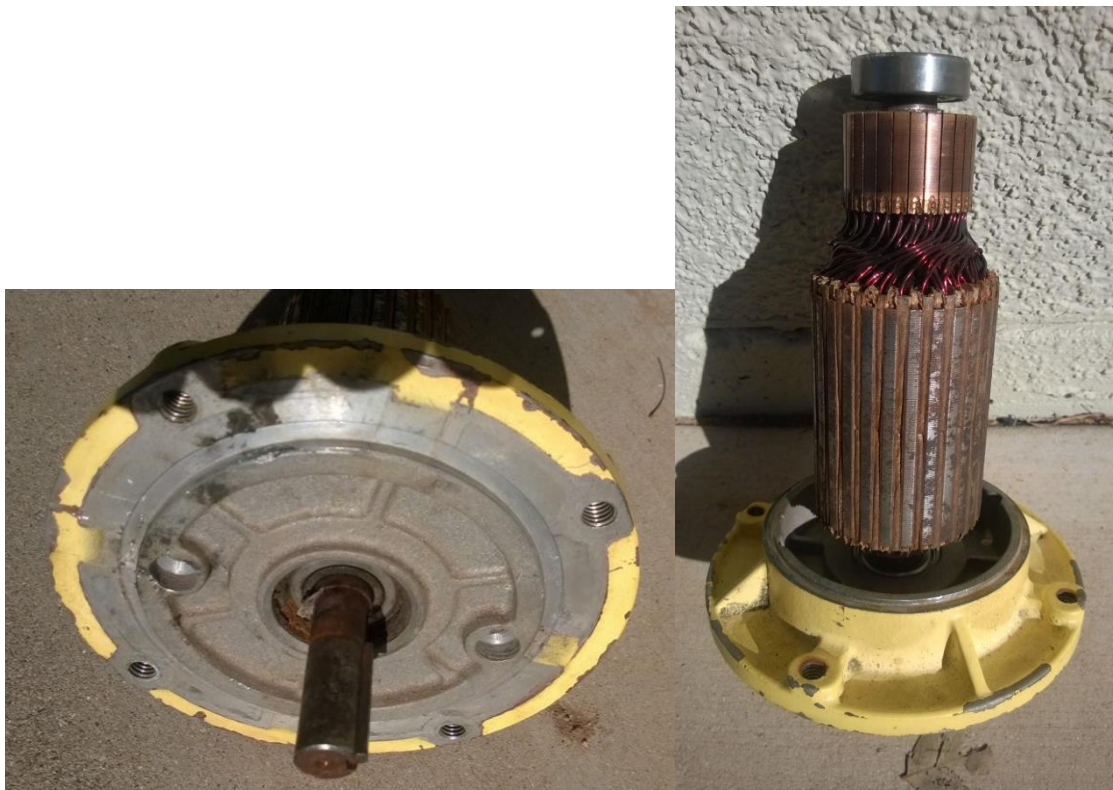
Motor shaft and face (left) and side view of entire motor (right)
